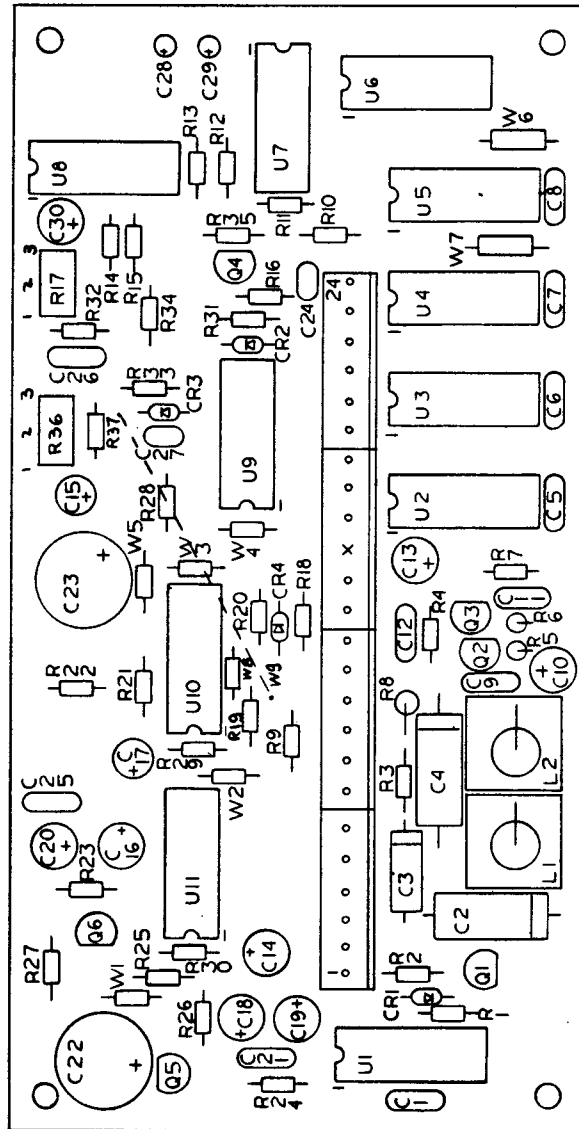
OPTION 15 ASSEMBLY DRAWING
